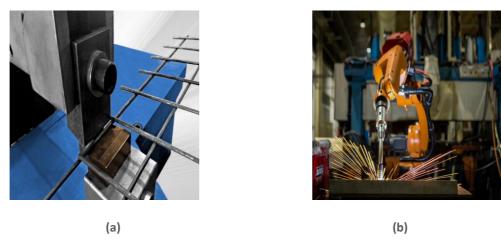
An example of (a)Edge Trimming & (b) Welding Process (cliffeng.com)
